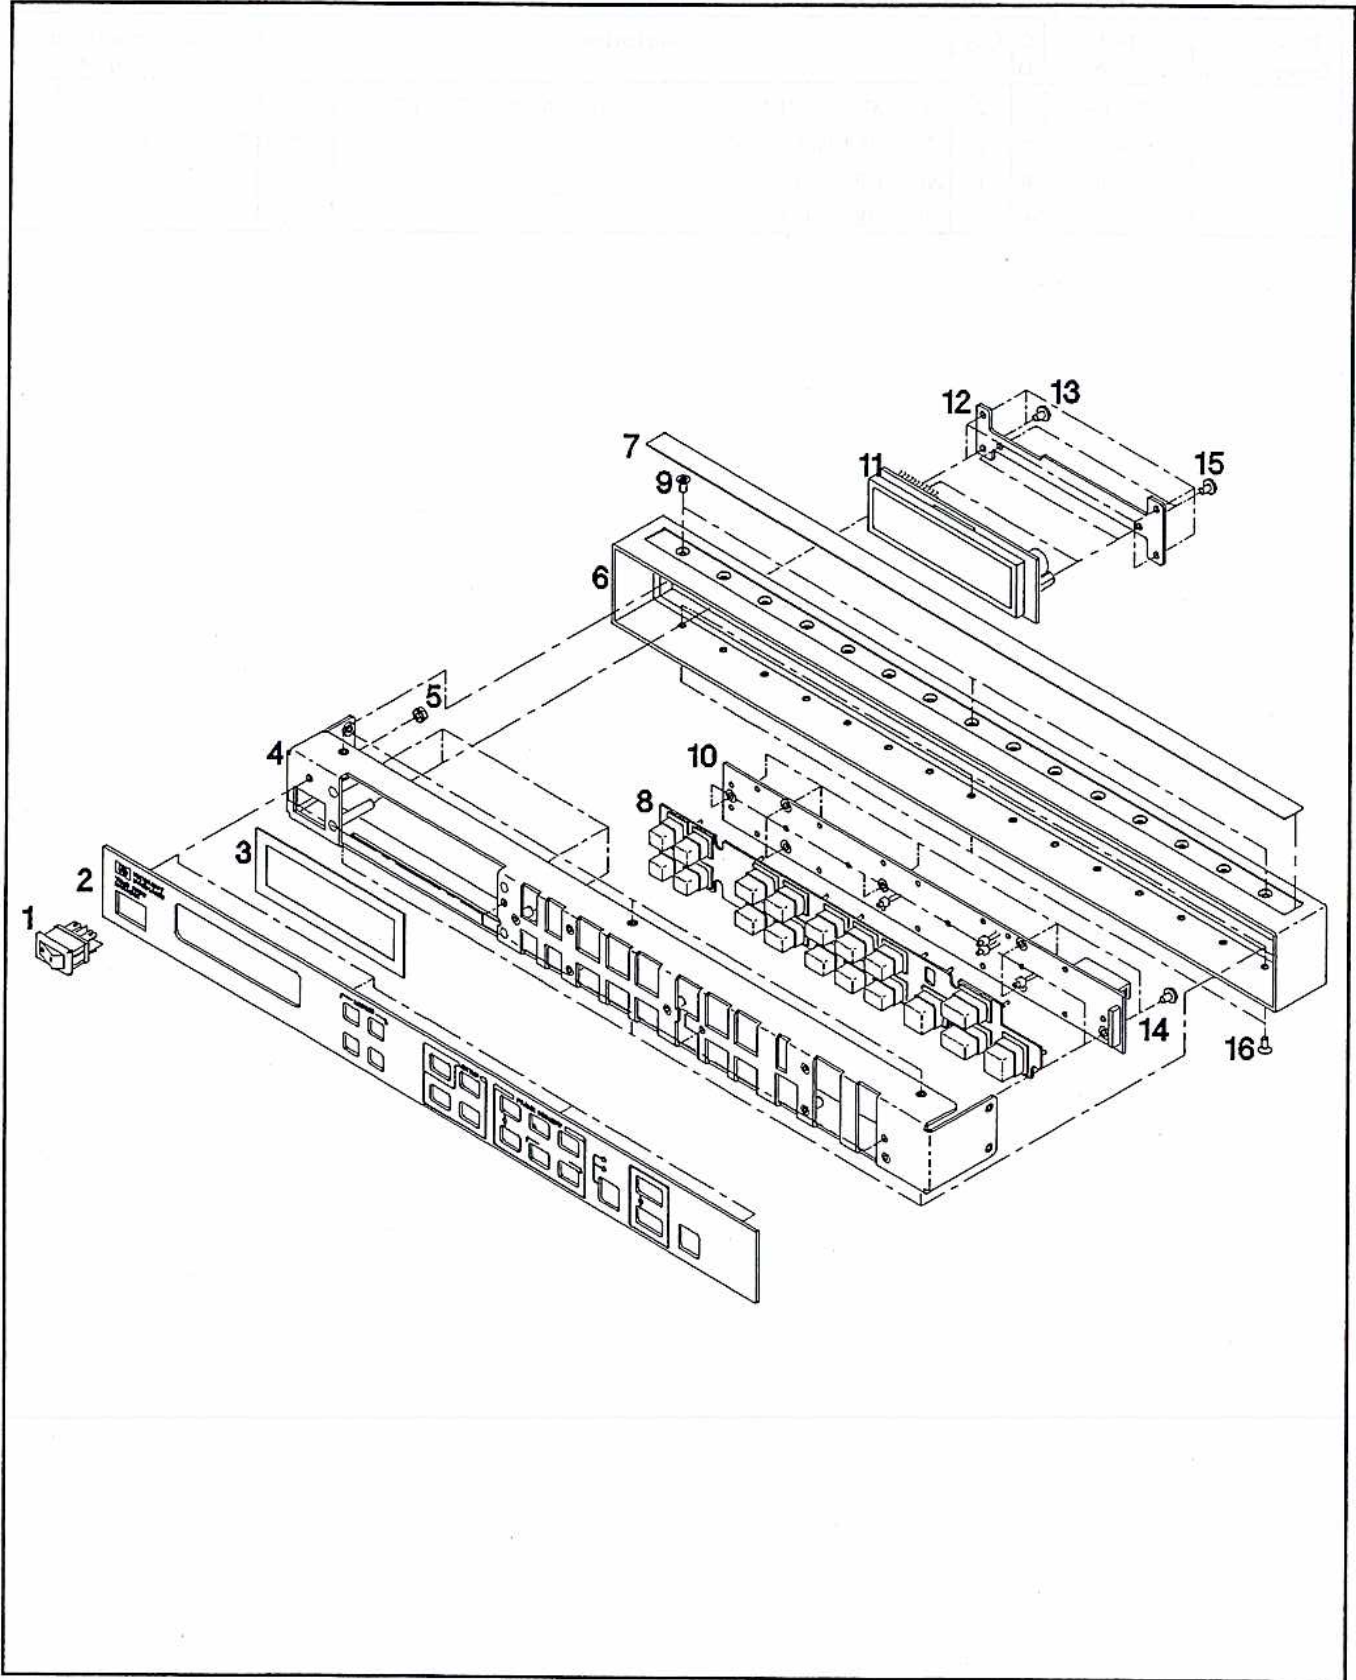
Front Panel Disassembly Illustrated Parts Breakdown
